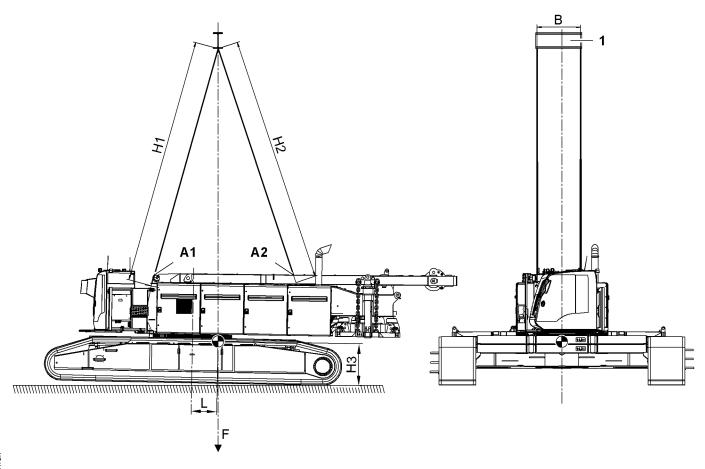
Loading the basic machine with crawler side frame, carbody counterweight and rear counterweight - overview
